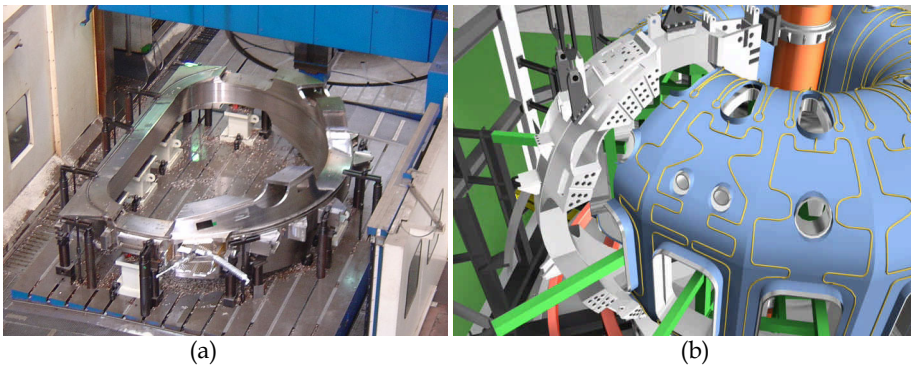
TF magnet structure fabrication and assembly. Final machining after coil encasing (a) and the schematic drawing of a TF magnet installation into torus of the vacuum vessel (b).
